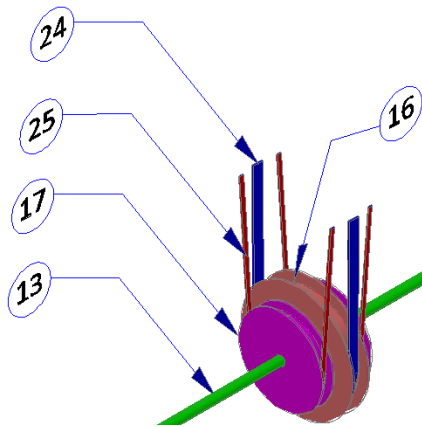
Spindle shaft and bobbin driver pulleys on the main shaft
